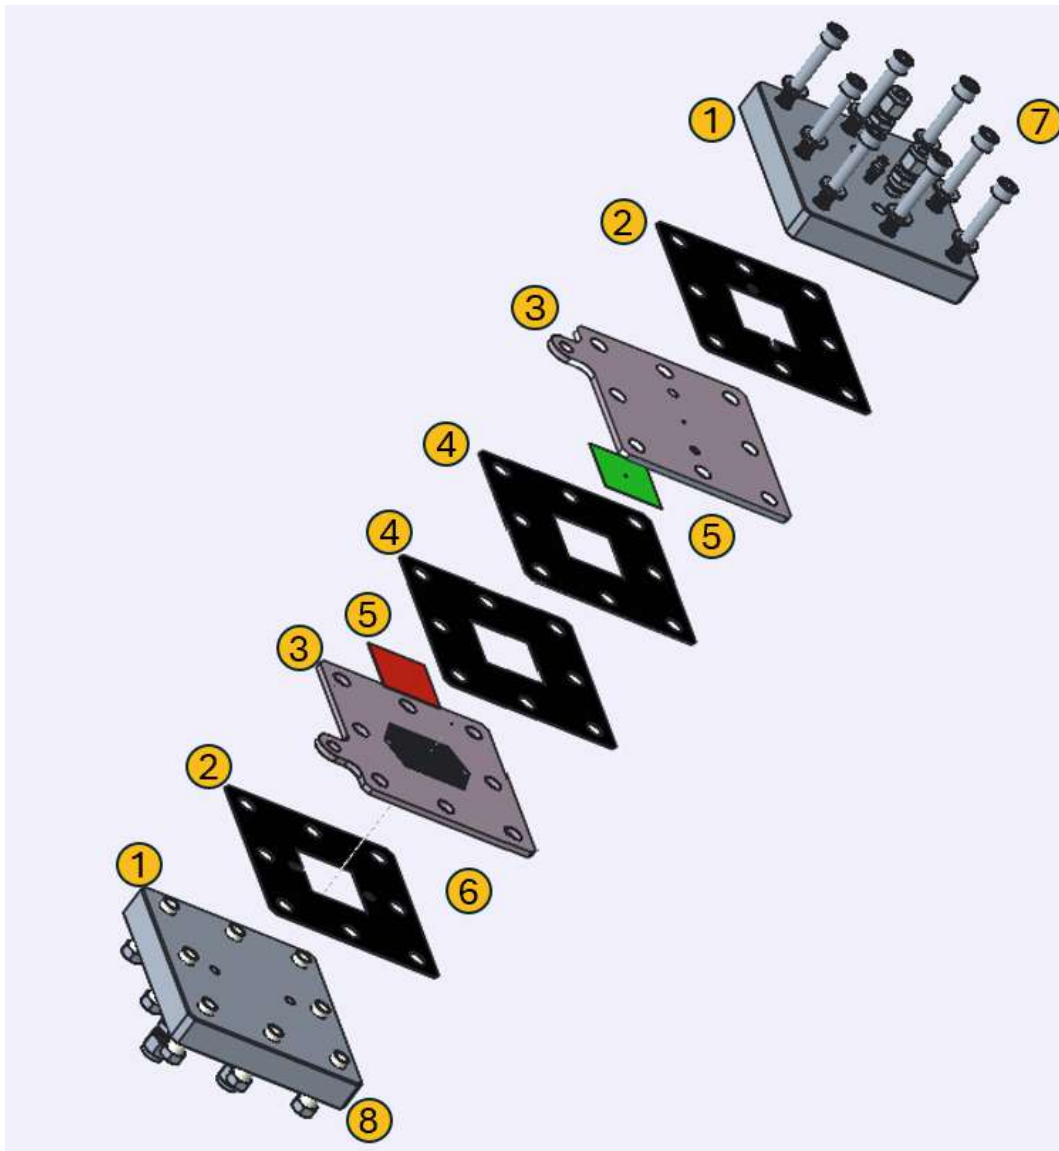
Exploded View of the 16cm<sup>2</sup> Cell Design
